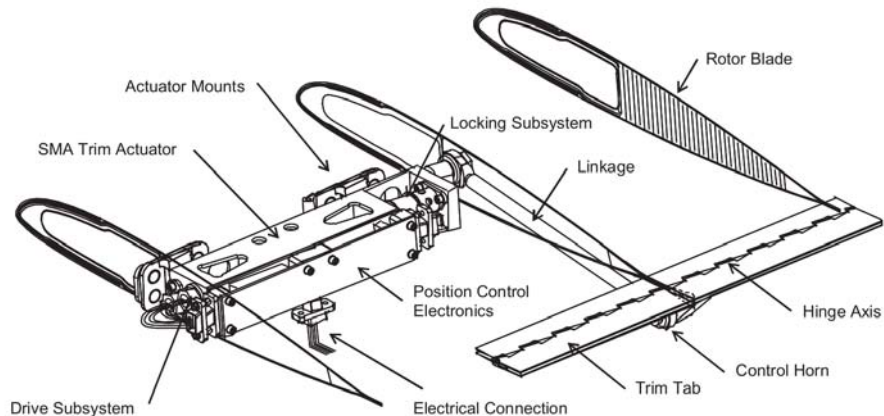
Rotor blade tracking system actuated using an SMA torque rod [Kennedy et al., 2004]
